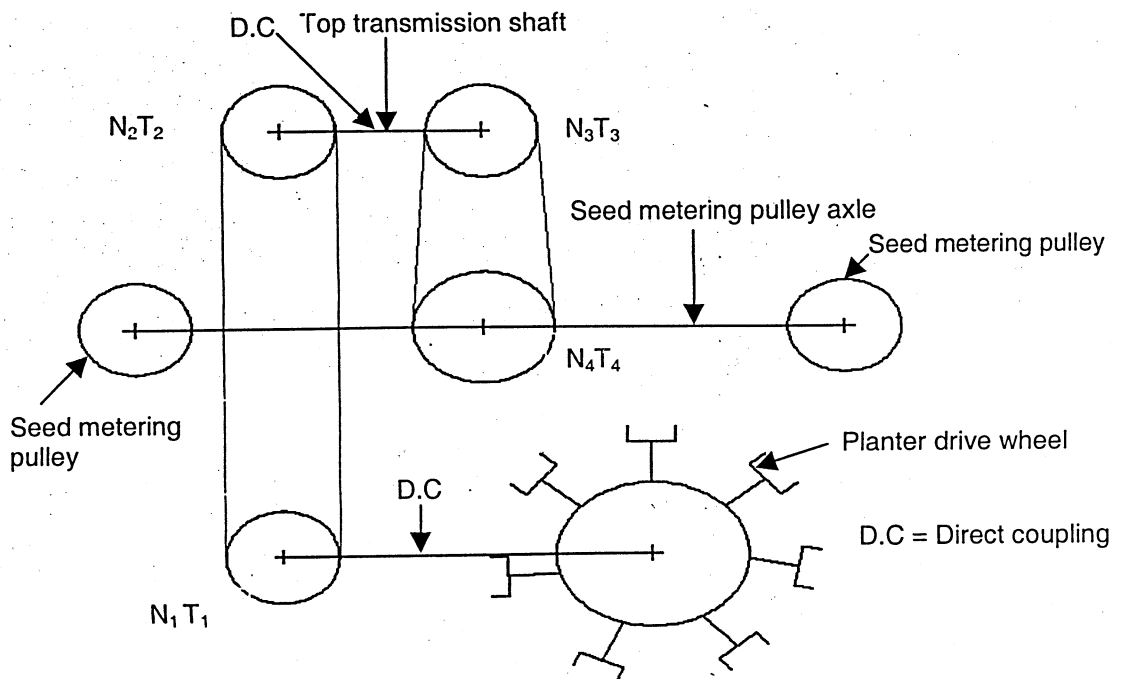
Power transmission from planter drive wheel to seed metering pulley
